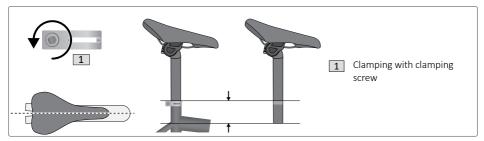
Adjusting the saddle height (clamp with clamping screw)
